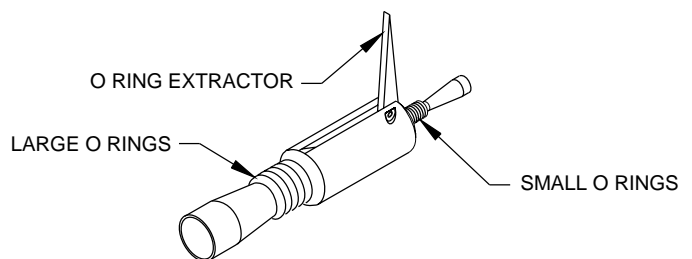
ULTRAFLW*™ O-RING TOOL
